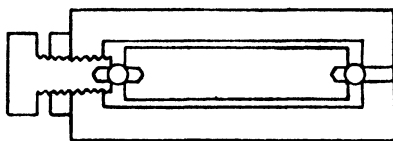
Hinged joint with ball pivots, holes co-axial.
